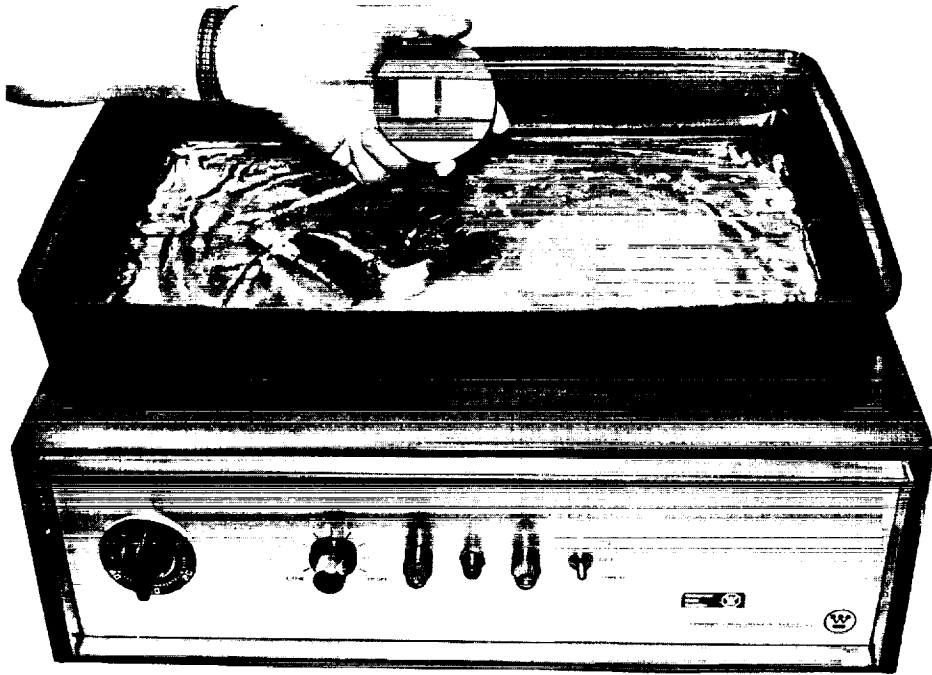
Mazur Lapping/Polishing Machine Showing a Wafer Holding Fixture About to be Placed on Glass Lapping Plate
